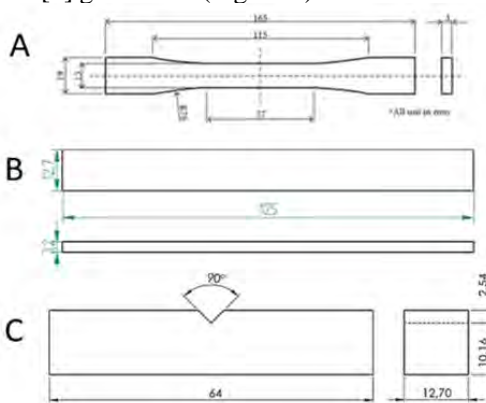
Dimension specimens (A) ASTM D638 Type1, (B) ASTM D790, (C) ASTM D256-03
